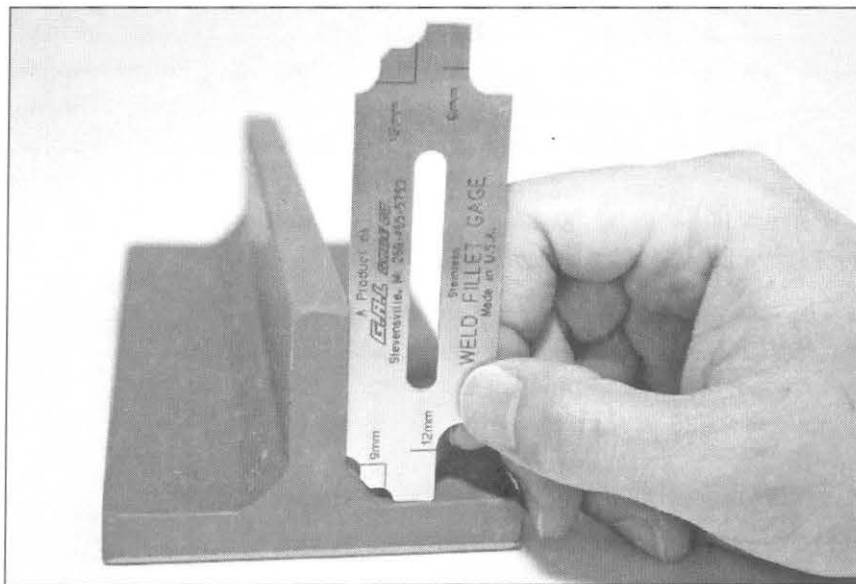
A concave fillet weld gage is used to determine weld size of a concave fillet weld.
